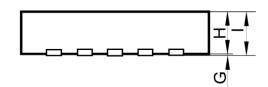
DFN(3x3)-10 Package dimensions (side view)
